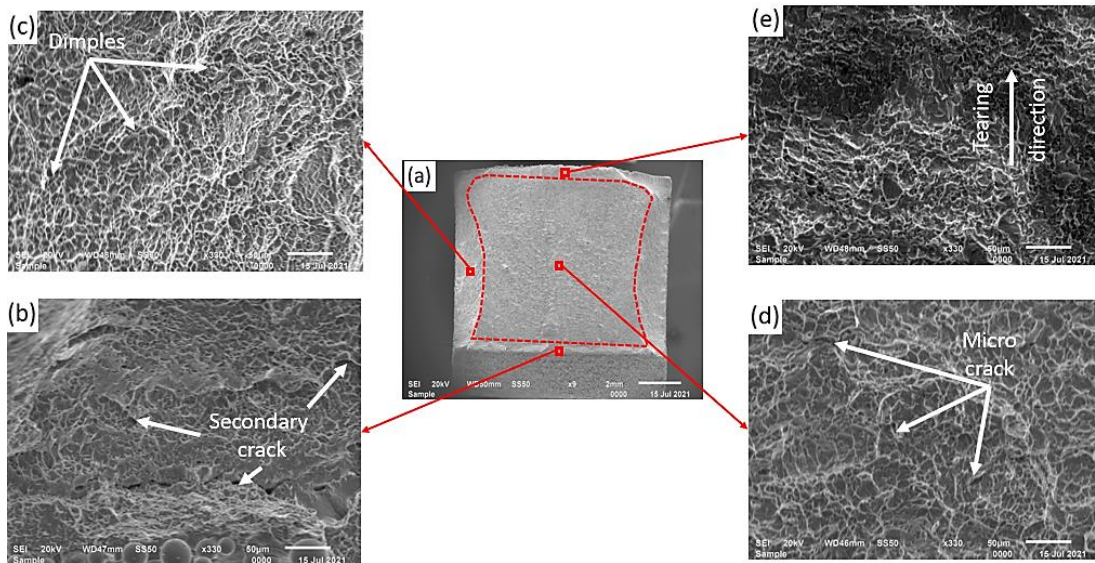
(a) SEM SE images of the fracture surface of a Z-specimen with 3D-printed V-notch, (b) crack initiation zone, (c) shear-lip region (d) unstable fracture and (e) final fracture
